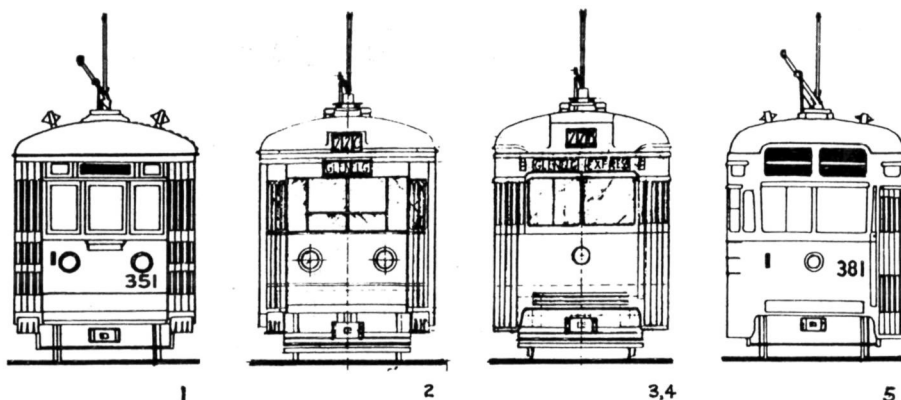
, being MTT drawing 13619A, was drawn by Ron Stucker and checked by Engineer WF Elford (later Chief Engineer), but is not signed by the General Manager, nor dated. It now includes inward folding doors without a folding step, a body skirt, a further revision of the front end design including two destination signs, and retention of the destination number box included on the previous drawing. It is interesting that number 22 is shown, then allocated to Henley Beach (Glenelg had no assigned route number at the time), but later notionally allocated to Glenelg in the route numbering of the 1960s. The tracing also shows that two front headlights had originally been drawn, but had later been amended to a single central headlight. The plan shows a separate motorman's compartment, with side air vents at standee window level. This drawing was cancelled on 9 June 1949.
